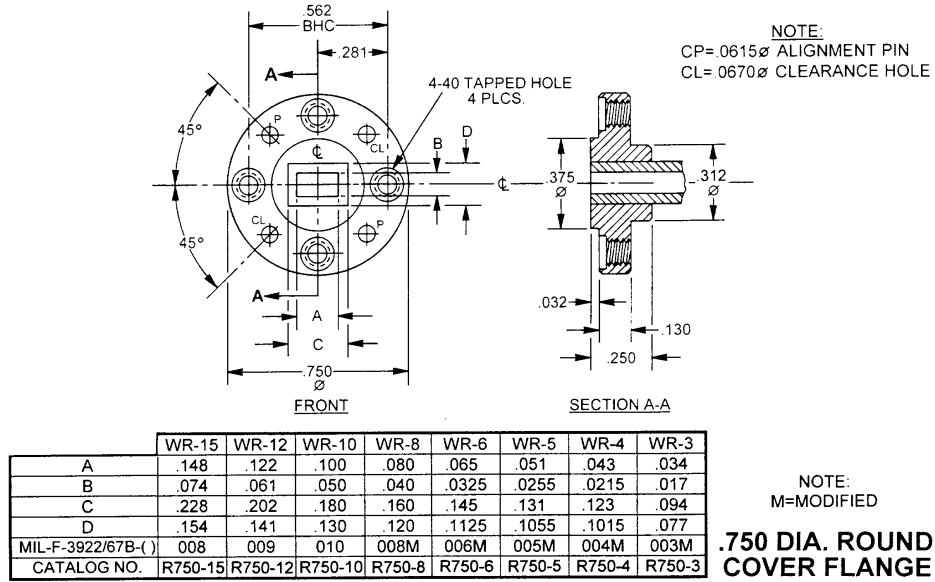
The MIL Spec 0.75" round flange (UG-387 type) (from the Custom Microwave catalog). Dimensions in inches.
